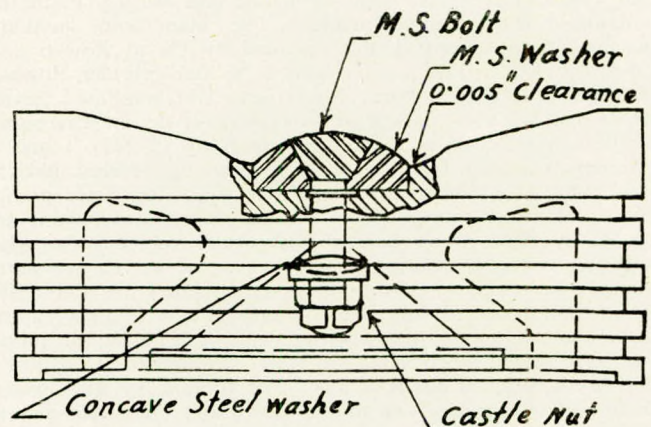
Showing the method adopted for repairing a cracked 20-in. diameter piston head
